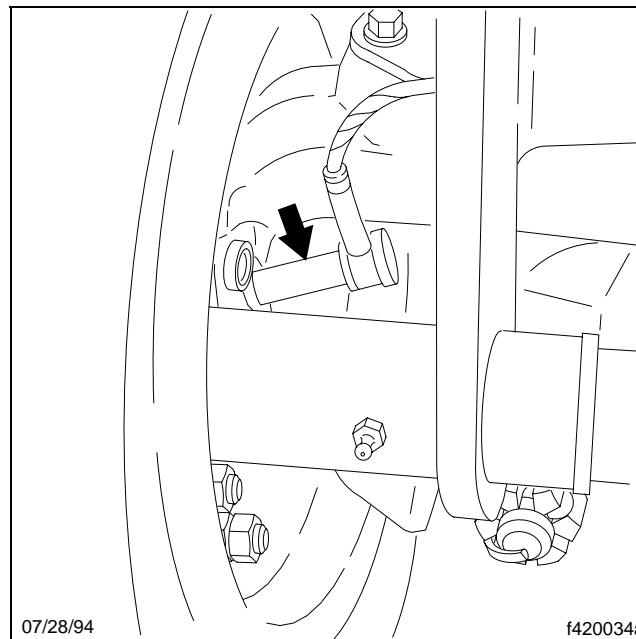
, Front Wheel Speed Sensor Removal (typical)
